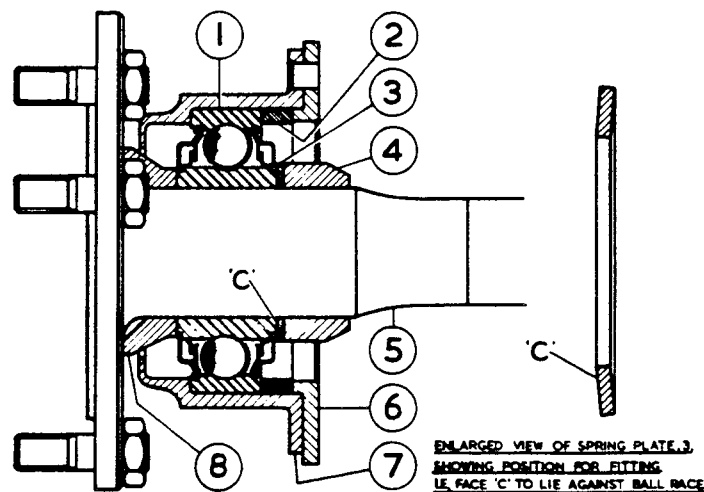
SECTION - REAR AXLE SHAFT ASSEMBLY.
